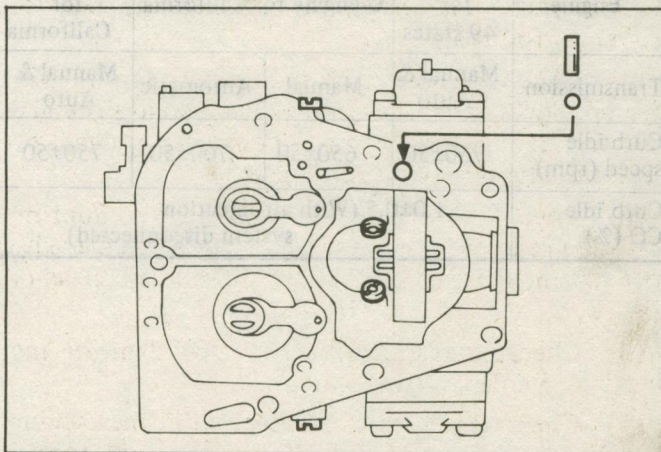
Accelerator Pump Discharge Check Ball and Weight Location
